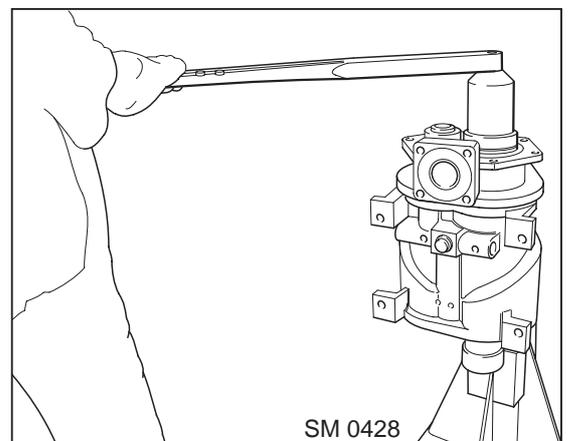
Fitting Guide Bush for Locknut Spanner on Male Shaft
